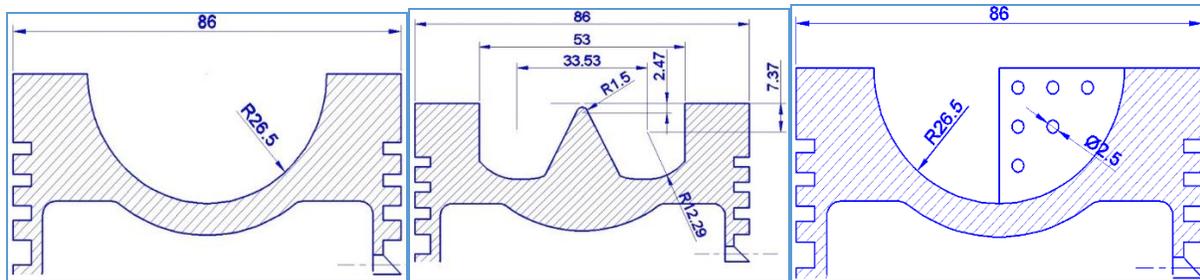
Dimensions for standard piston (SP) (Left), Toroidal combustion chamber (TCC) (Center) and Swirl blade combustion chamber (SCC) (Right)
